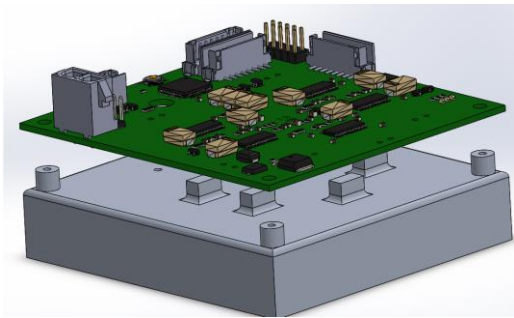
PCB With Heatsink for Motor Driver Heat Dissipation
